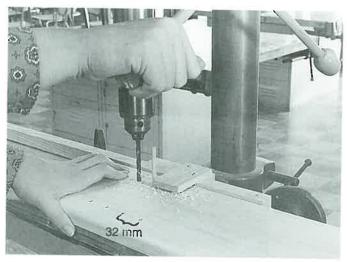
Line boring for system holes in a base cabinet side. (Chuck Davis Cabinets)
